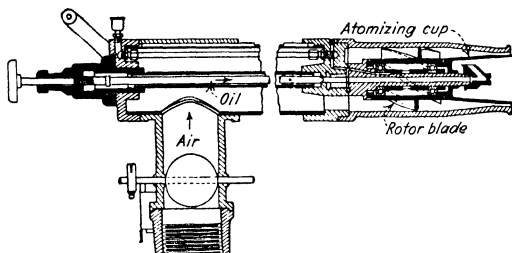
Cup-type oil burner driven by air turbine. (*Simplex Oil Heating Corporation.*)
